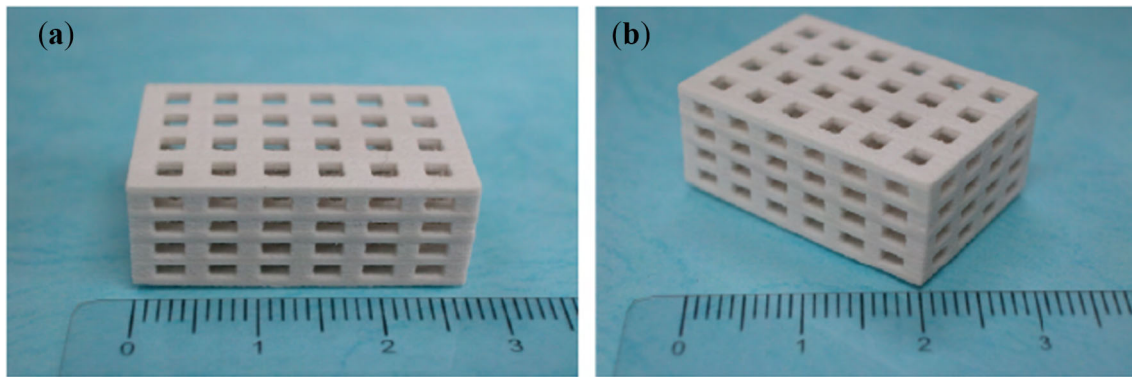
A silica part with inner channel structure fabricated using CLG technique. Parts (a) and (b) show the image of the same part with different views [102].
